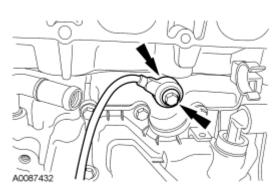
Locating Knock Sensor Bolt Courtesy of FORD MOTOR CO.
